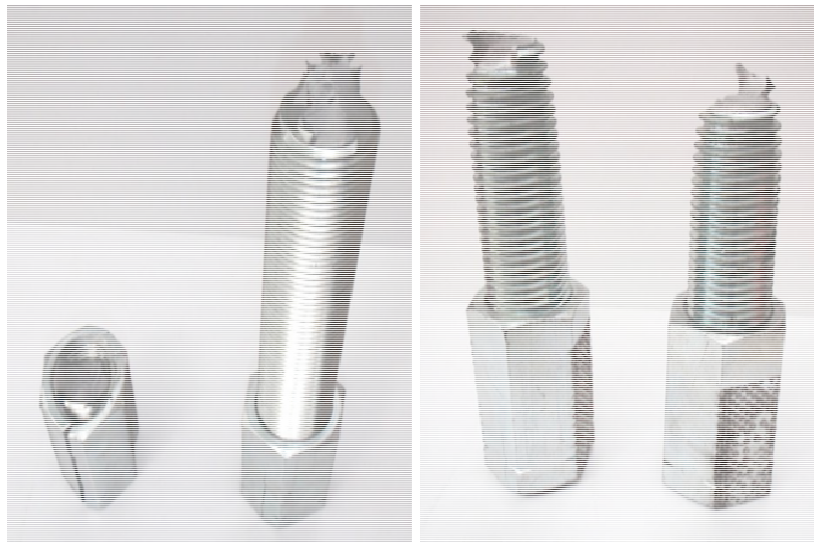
Examples of unacceptable and acceptable threaded rod test specimens. Photos courtesy of S. Dalton.
